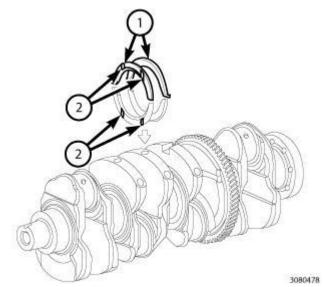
CRANKSHAFT BEARING SIZE MARK Courtesy of CHRYSLER LLC
